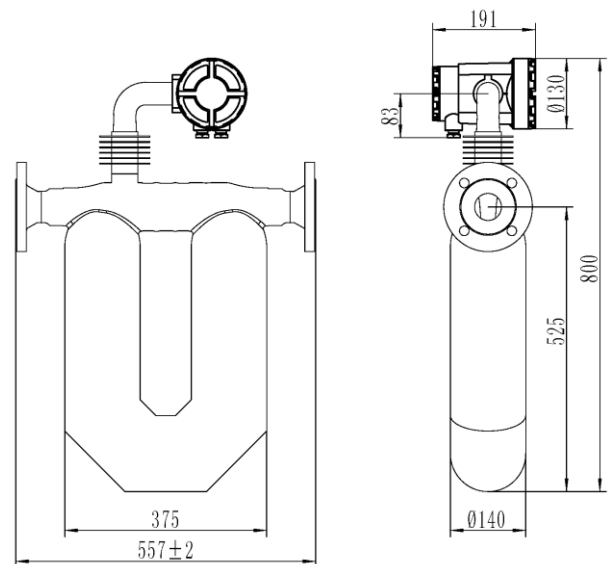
The overall dimensions of AMF050-TL4I (U tube)
